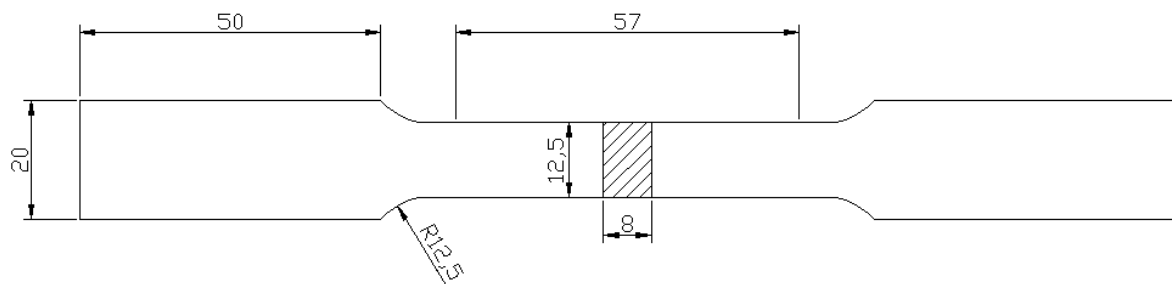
B Tow Dimension of the specimen (Weld) (mm)
